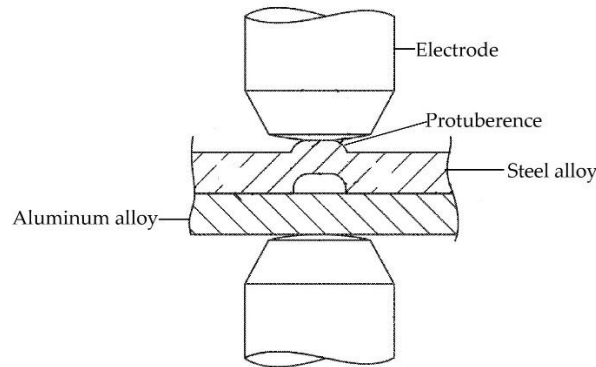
Spot welding arrangement using protuberance (Yang & Sigler, 2015)
